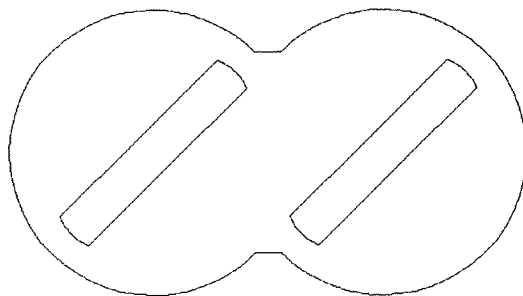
Two-dimensional internal mixer with rotor blades.
